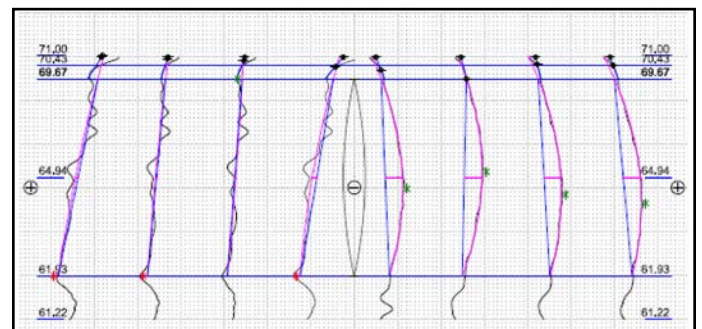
Left and right flank of four gear teeth on tested gear before testing.
